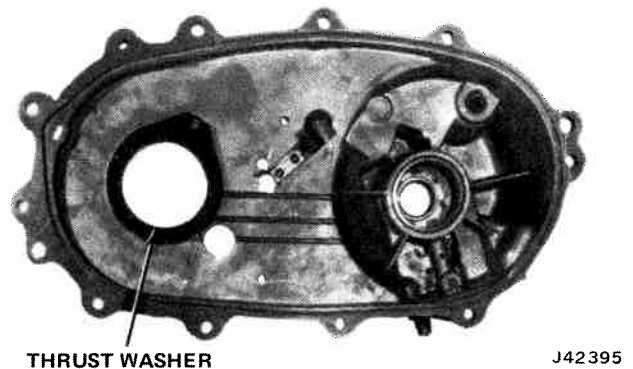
Drive Sprocket Thrust Washer in Position on Case Cover
